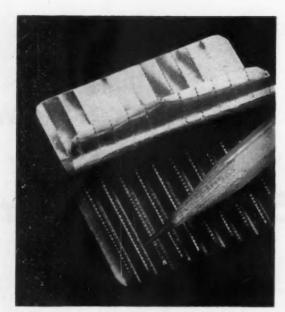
Mass-produced sandwich construction can now be formed in sheets 30 in. wide.
